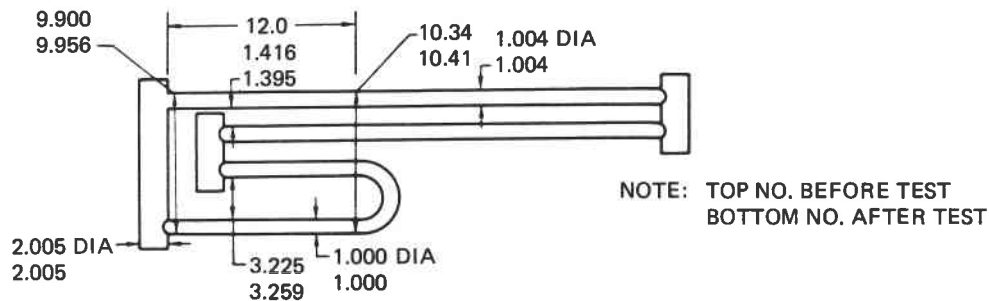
Test Results—Specimen Dimensional Changes (Inches)
